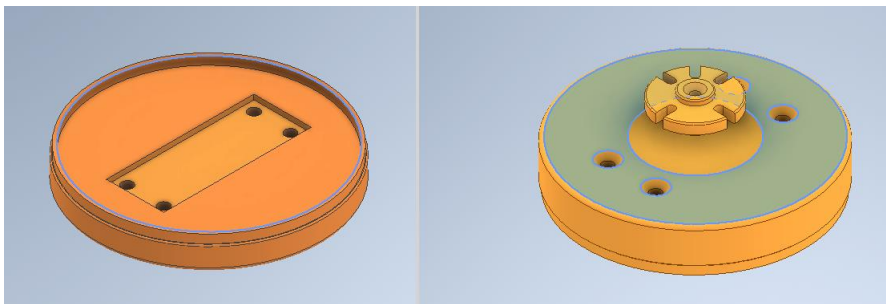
Some parts obtained by CAD and 3D printing (Carvalho, 2020).
